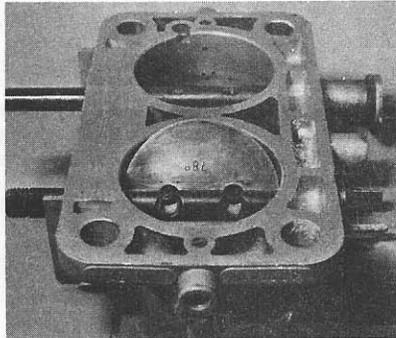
Tool for holding throttle shaft (DFA and DFAV types) (Sec 5)
